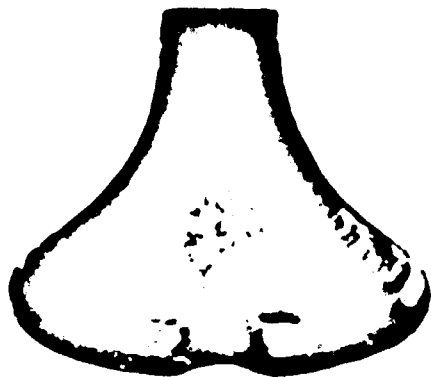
Burnt place on exhaust valve of a 4OD motor.
